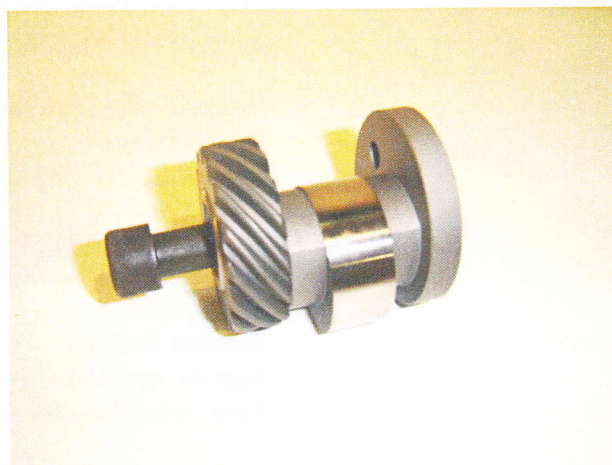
Distributor Drive Gear, Fuel Pump Eccentric & bolt.
